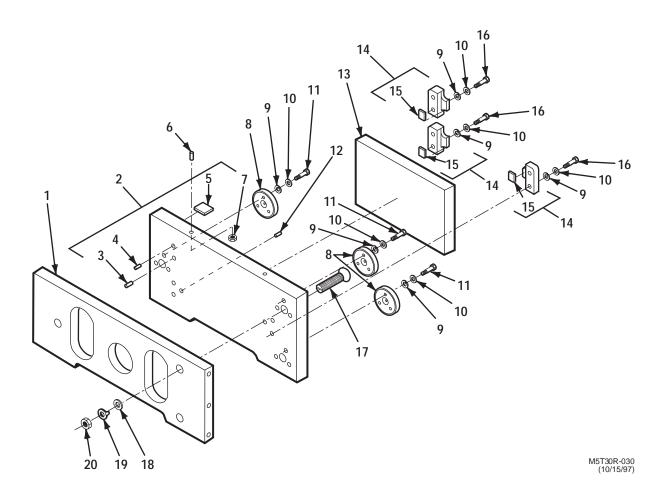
Group 04C0102 and 07C0102 Folding Mirror Assembly SM-D-804945
